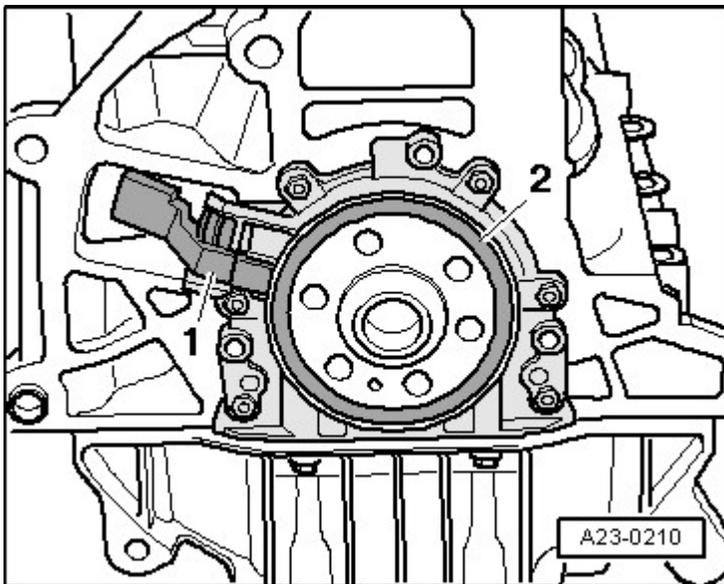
Component Location Engine Speed (RPM) Sensor G28
